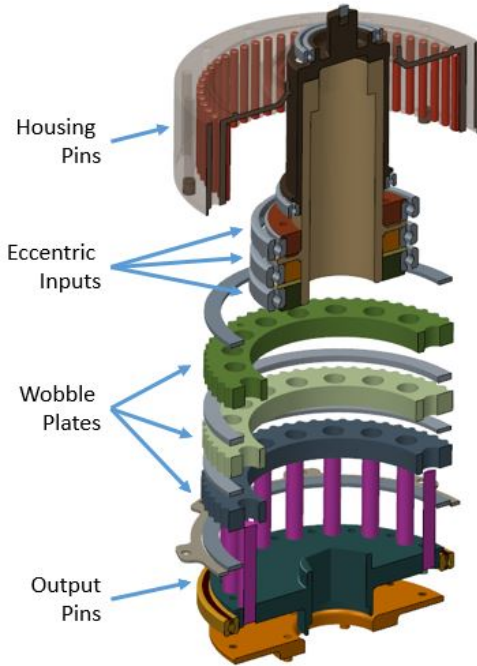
Exploded view of the cycloidal reducer. Three wobble plates are driven by the input shaft with 120° offsets. The ring pins are free pins inserted in the housing. The output has pins that run through all three wobble plates to harness the counter-rotation for the drive output.
